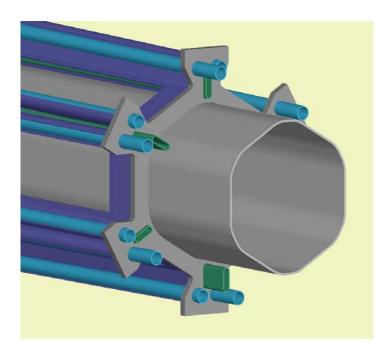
Cooling tubes end in the manifolds of the outer bulkhead.
